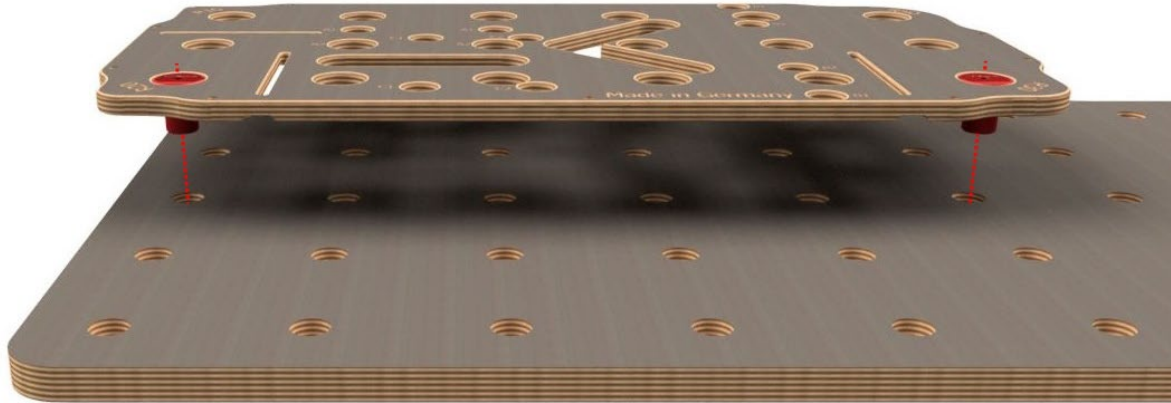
Inserting the bench dogs to extend the hole pattern with the Ø30mm version
